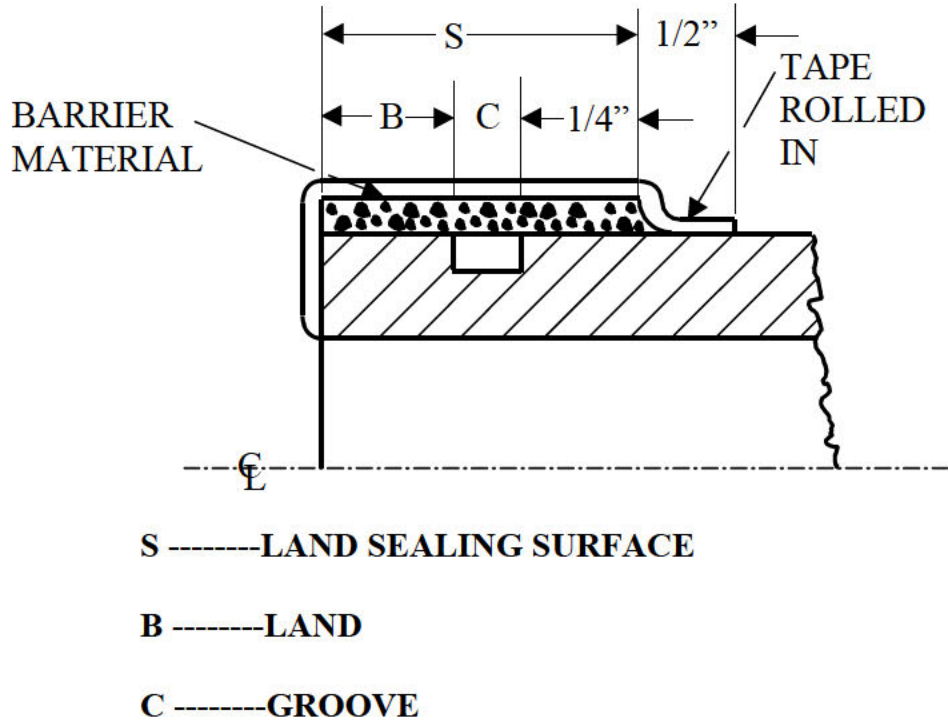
Land sealing surface for grooved end pipe, tube end fittings.
